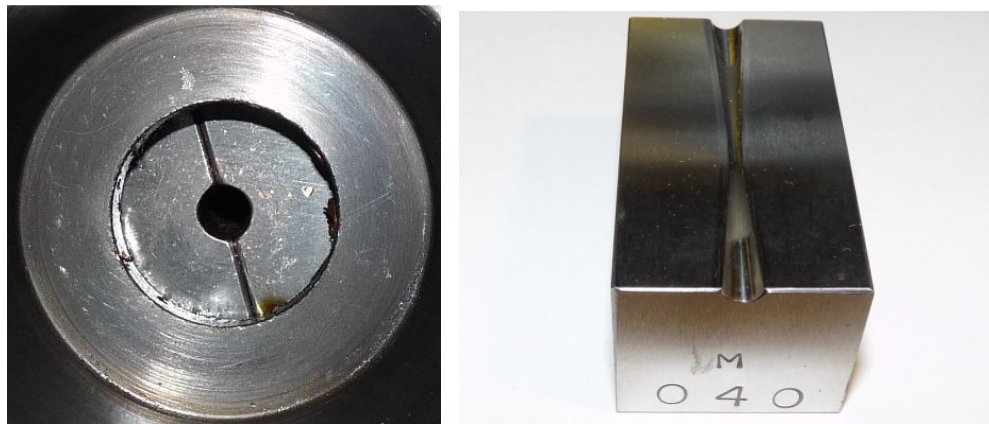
Swager machine for uniaxial elongation, and the swaging die that reduces the diameter of rods or tubes in the swager machine.
